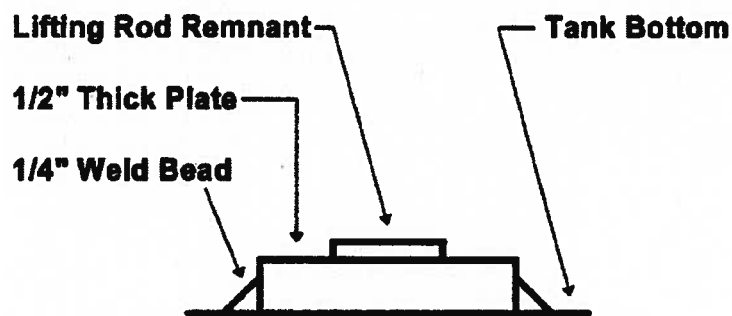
Lifting Plate Elevation View. (Not to Scale)
